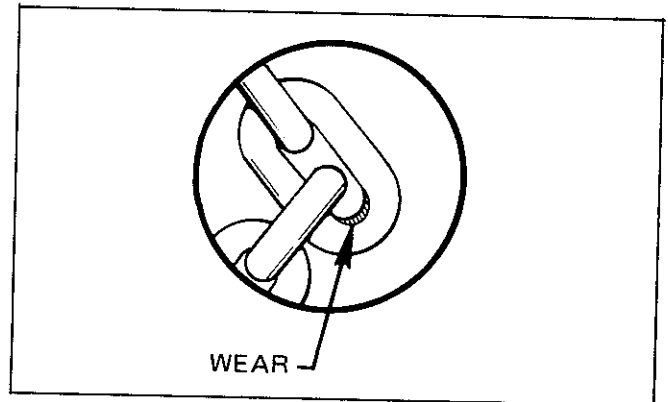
Check Chain Wear at Bearing Surfaces Between Links
